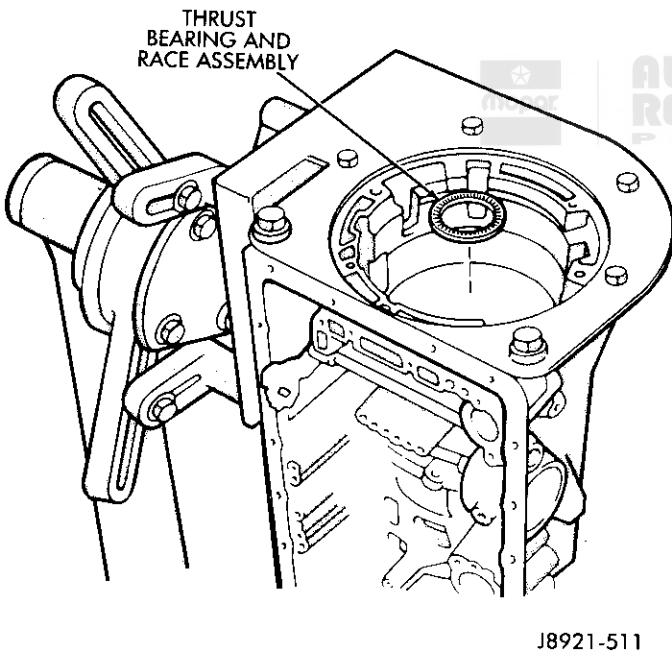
Removing Planetary And Brake Drum Thrust Bearing And Race Assembly
